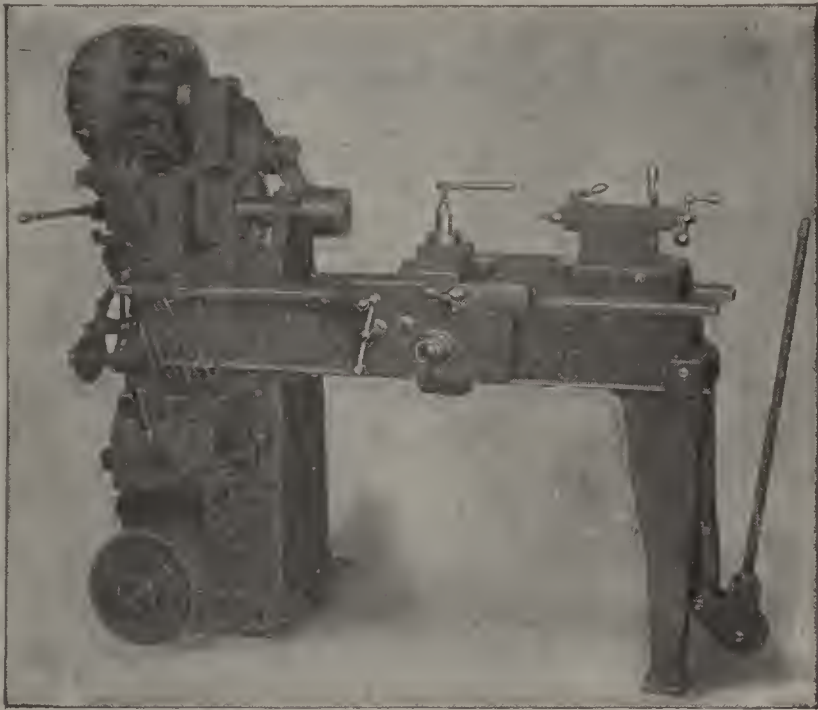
WESTINGHOUSE POLYPHASE INDUCTION MOTOR, GEARED TO PORTABLE LATHE.
